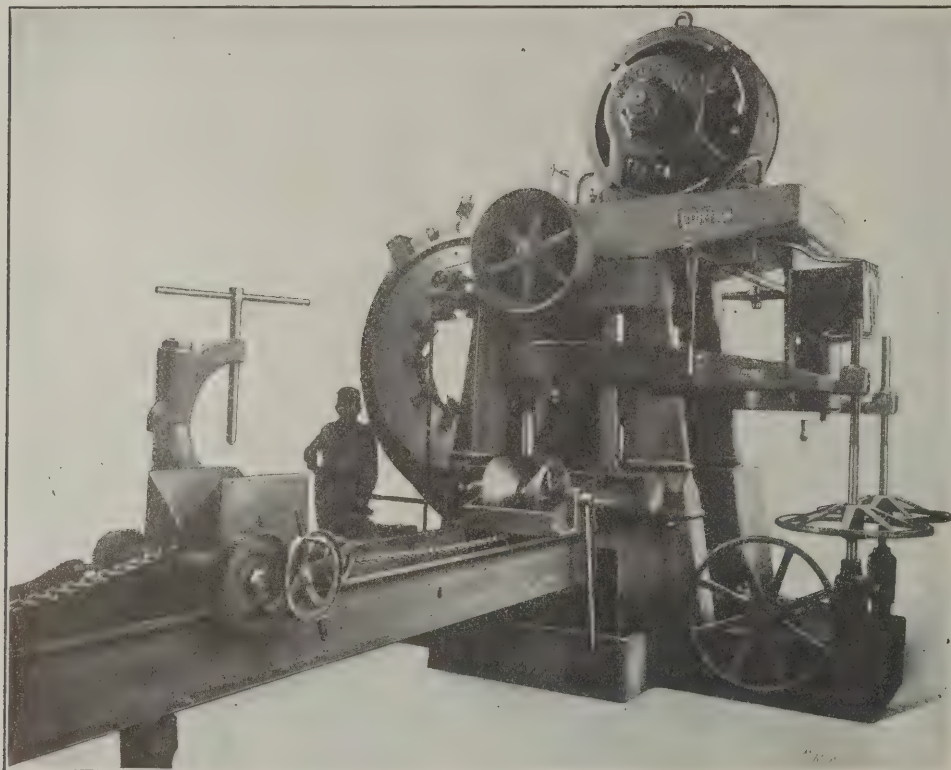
Gorton Sixteen-inch Cutting-off Machine with Drum raised to provide Access to Cutters
